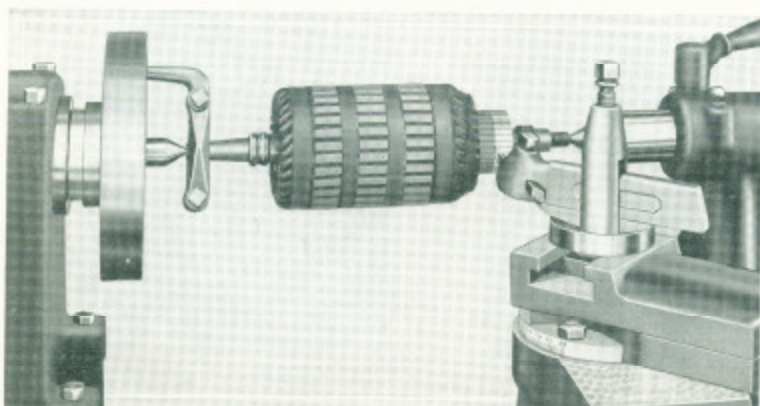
Truing an armature commutator on the No. 2 South Bend Brake Drum Lathe
